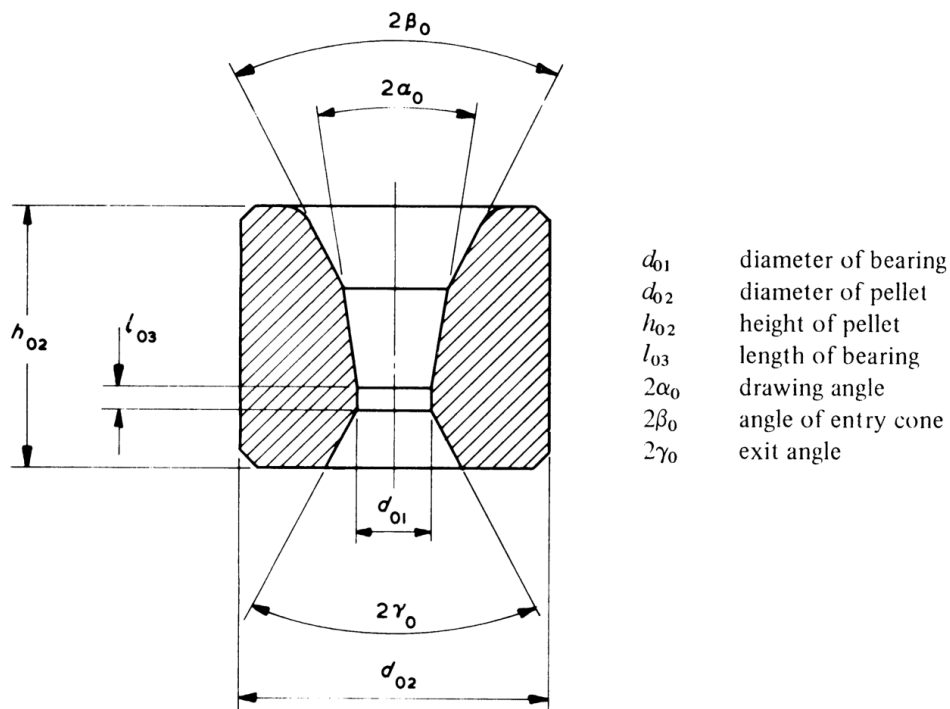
Symbols for as-sintered pellets for drawing round wire
